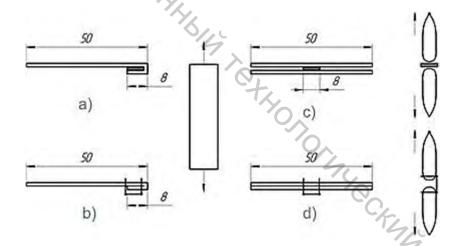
Used joints and schemas of their tensile testing: a) bonded hemming seam; b) sewing hemming seam; c) bonded flat seam; d) sewing flat seam
